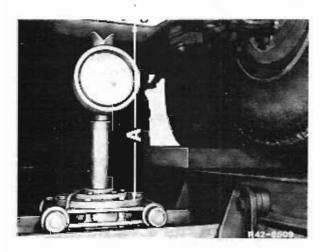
Distance A must correspond to the dimension in fig. 1, however, with the blocks of wood removed.
